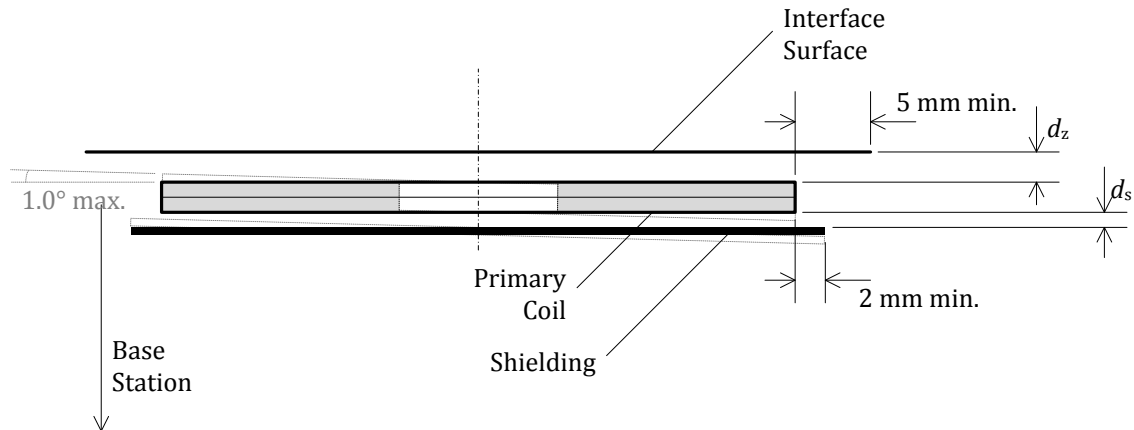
Primary Coil assembly of Power Transmitter design A2
